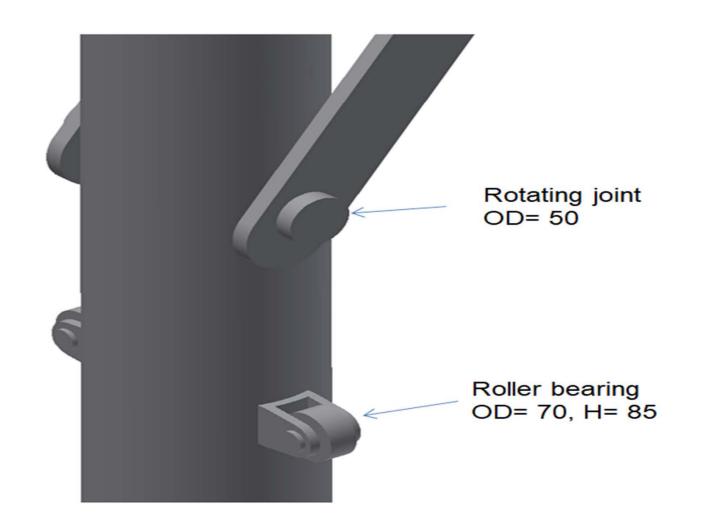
Roller bearing and rotating joint of fuel transfer basket
